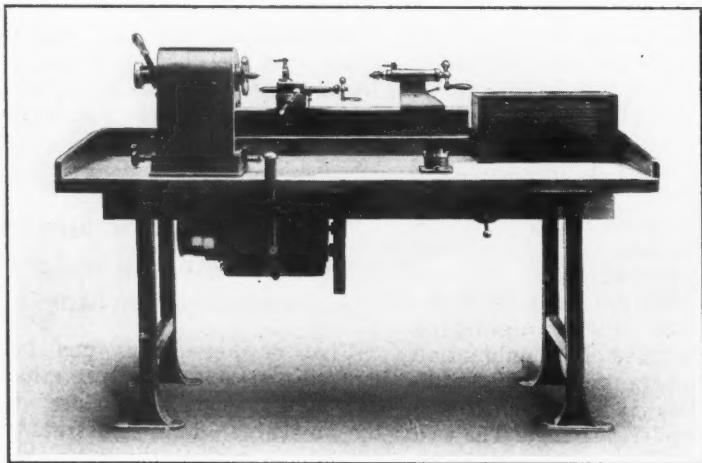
Rivett Bench Lathe with Enclosed Headstock and Speed-box Motor Drive
